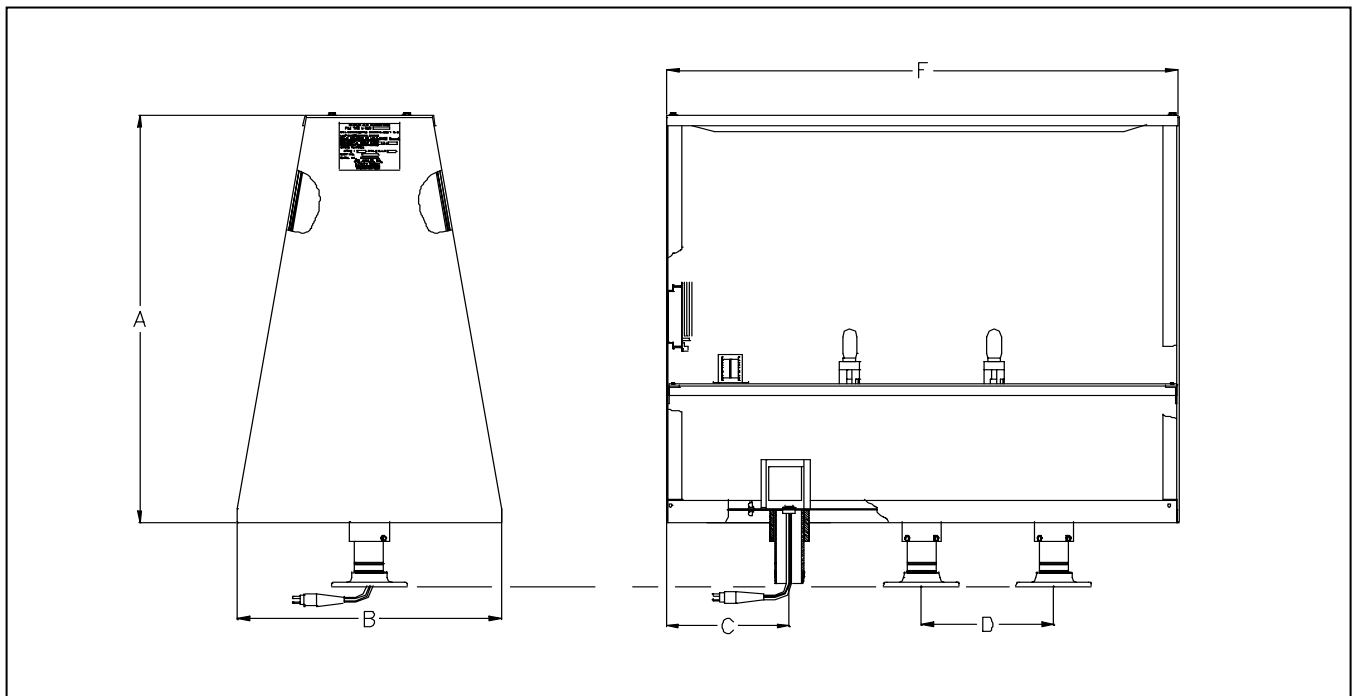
L-858 Low VA Sign Dimensions (Size 5)
